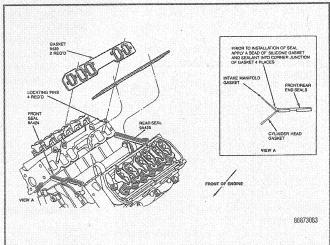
Lower intake manifold gasket and seal locations—3.8L engine
